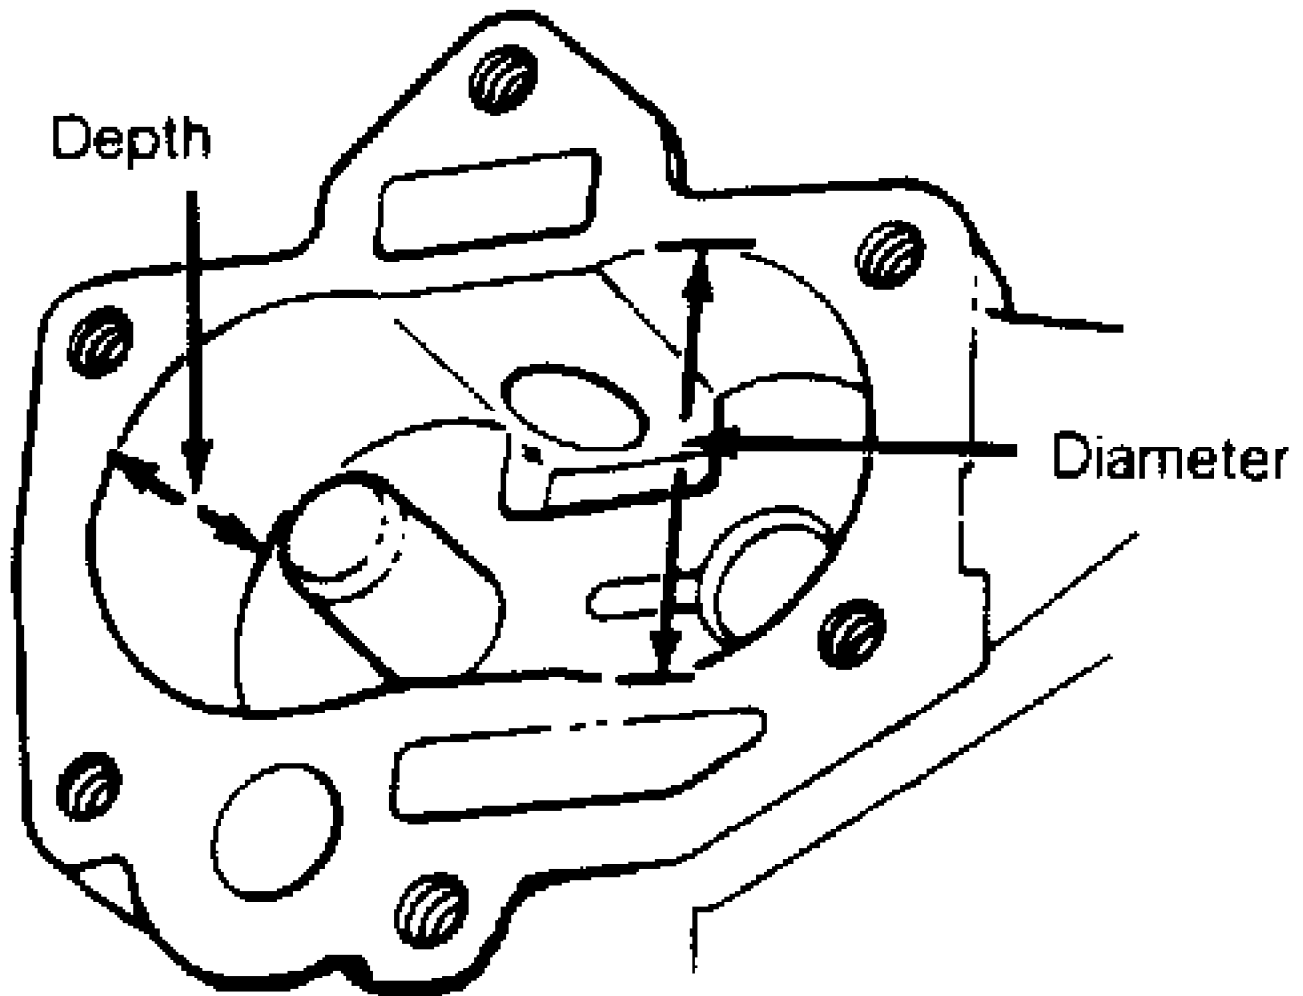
Measuring Oil Pump Gear Cavity - Typical
